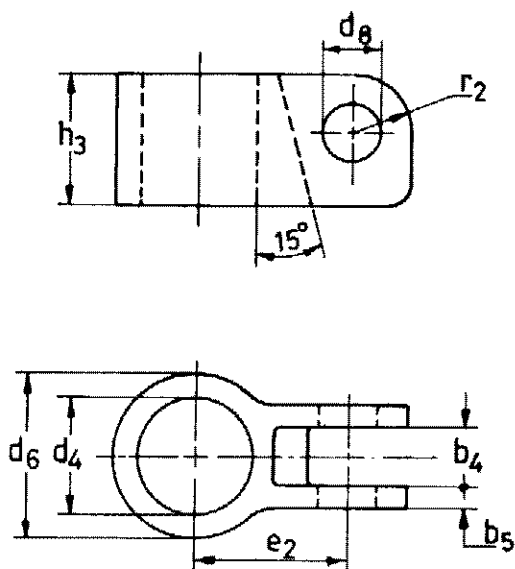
SHAPE OF LEAD BLOCK HOLDER, FORM H
